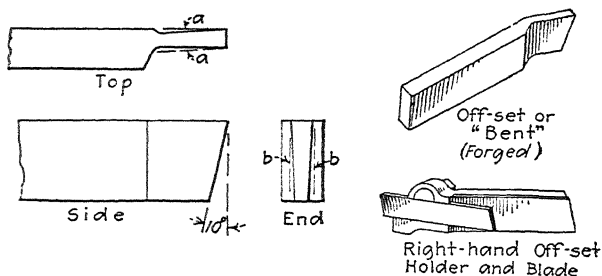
The cutting-off tool. The amount of clearance at (a) and also at (b) is very small, just enough to clear the sides of the groove being cut. Excessive clearance weakens the tool. One particular advantage of the patent cutting-off toolholder and blade is that the blade may be adjusted to project only the distance necessary.
